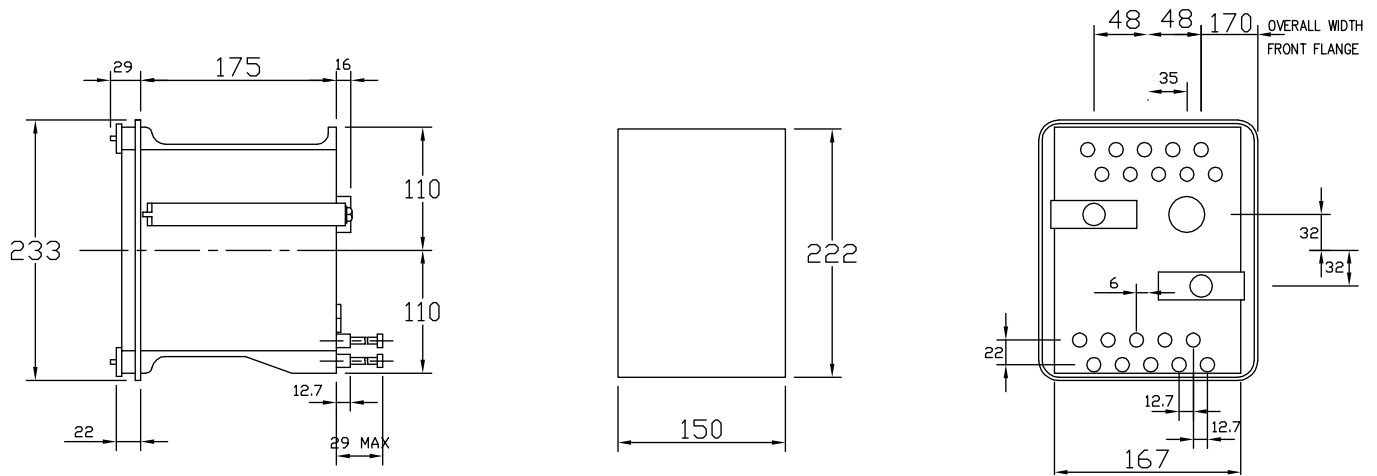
Case and panel cut-out dimensions for case 1D (All dimensions in mm)
